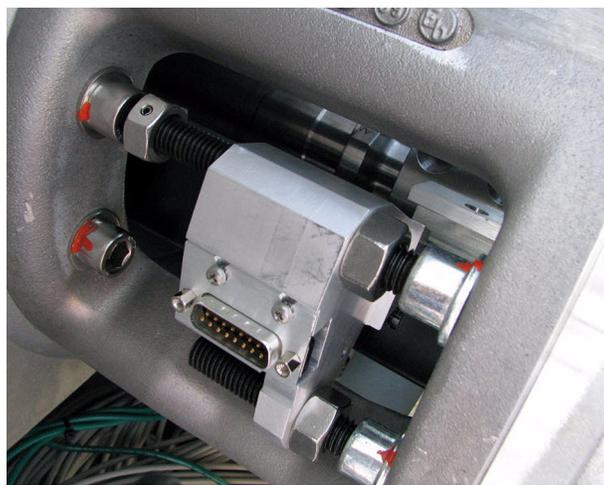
Top View of Hole in Shaft Guide (Detail)
